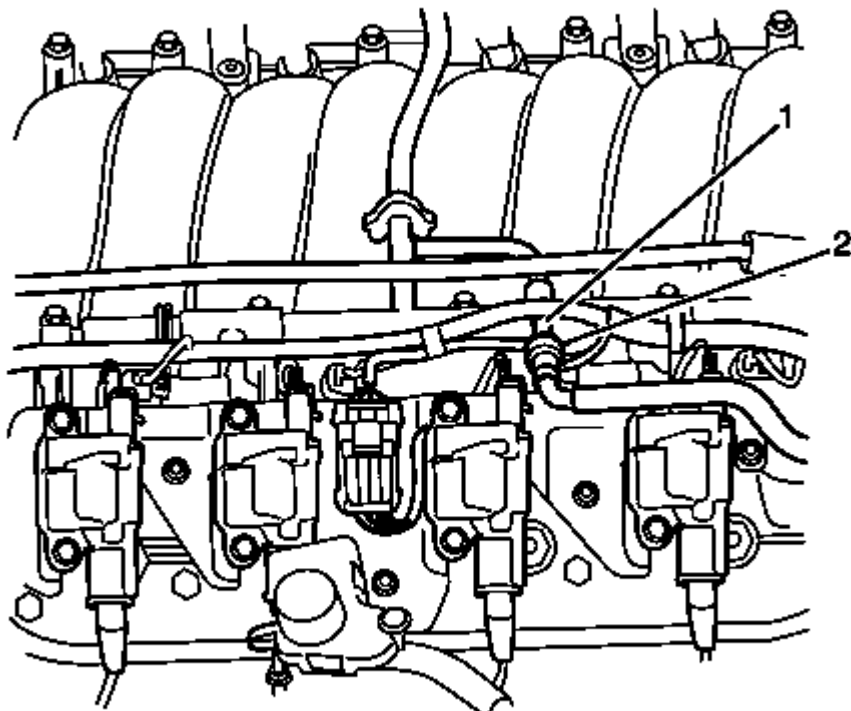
Identifying Fuel Rail Tube & Feed Pipe (Left Side)
